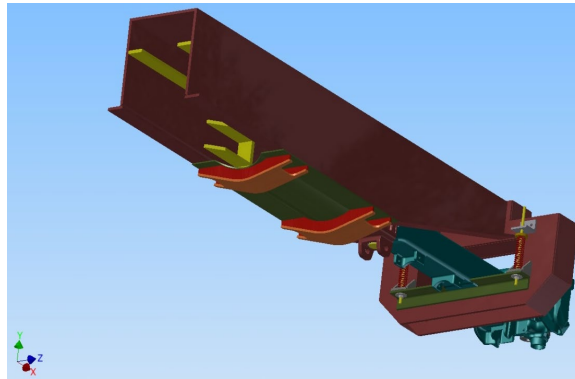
CAD Model of Draft Sill with Sprung Carrier and Carrier Plate Assembly
